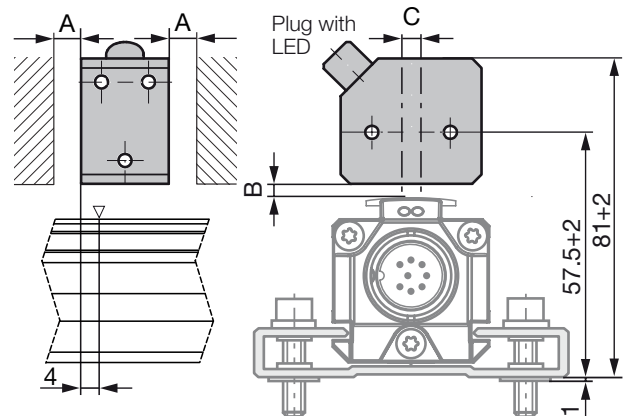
Dimensions and distances with BTL5-P-4500-1 electromagnet (24 V/100 mA)
